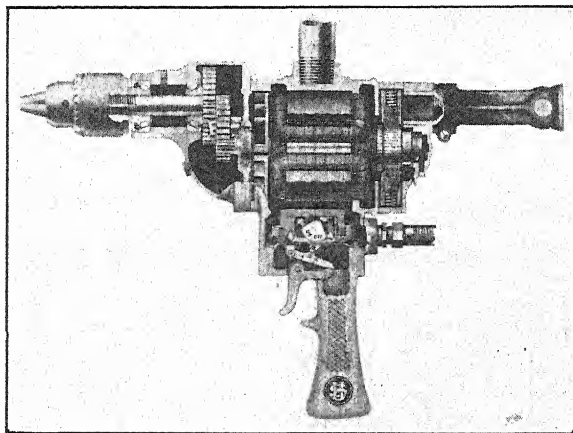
A Sectional View of the United States Electrical Tool Company's Heavy-Duty Ball-Bearing Universal Motor Portable Drill.
